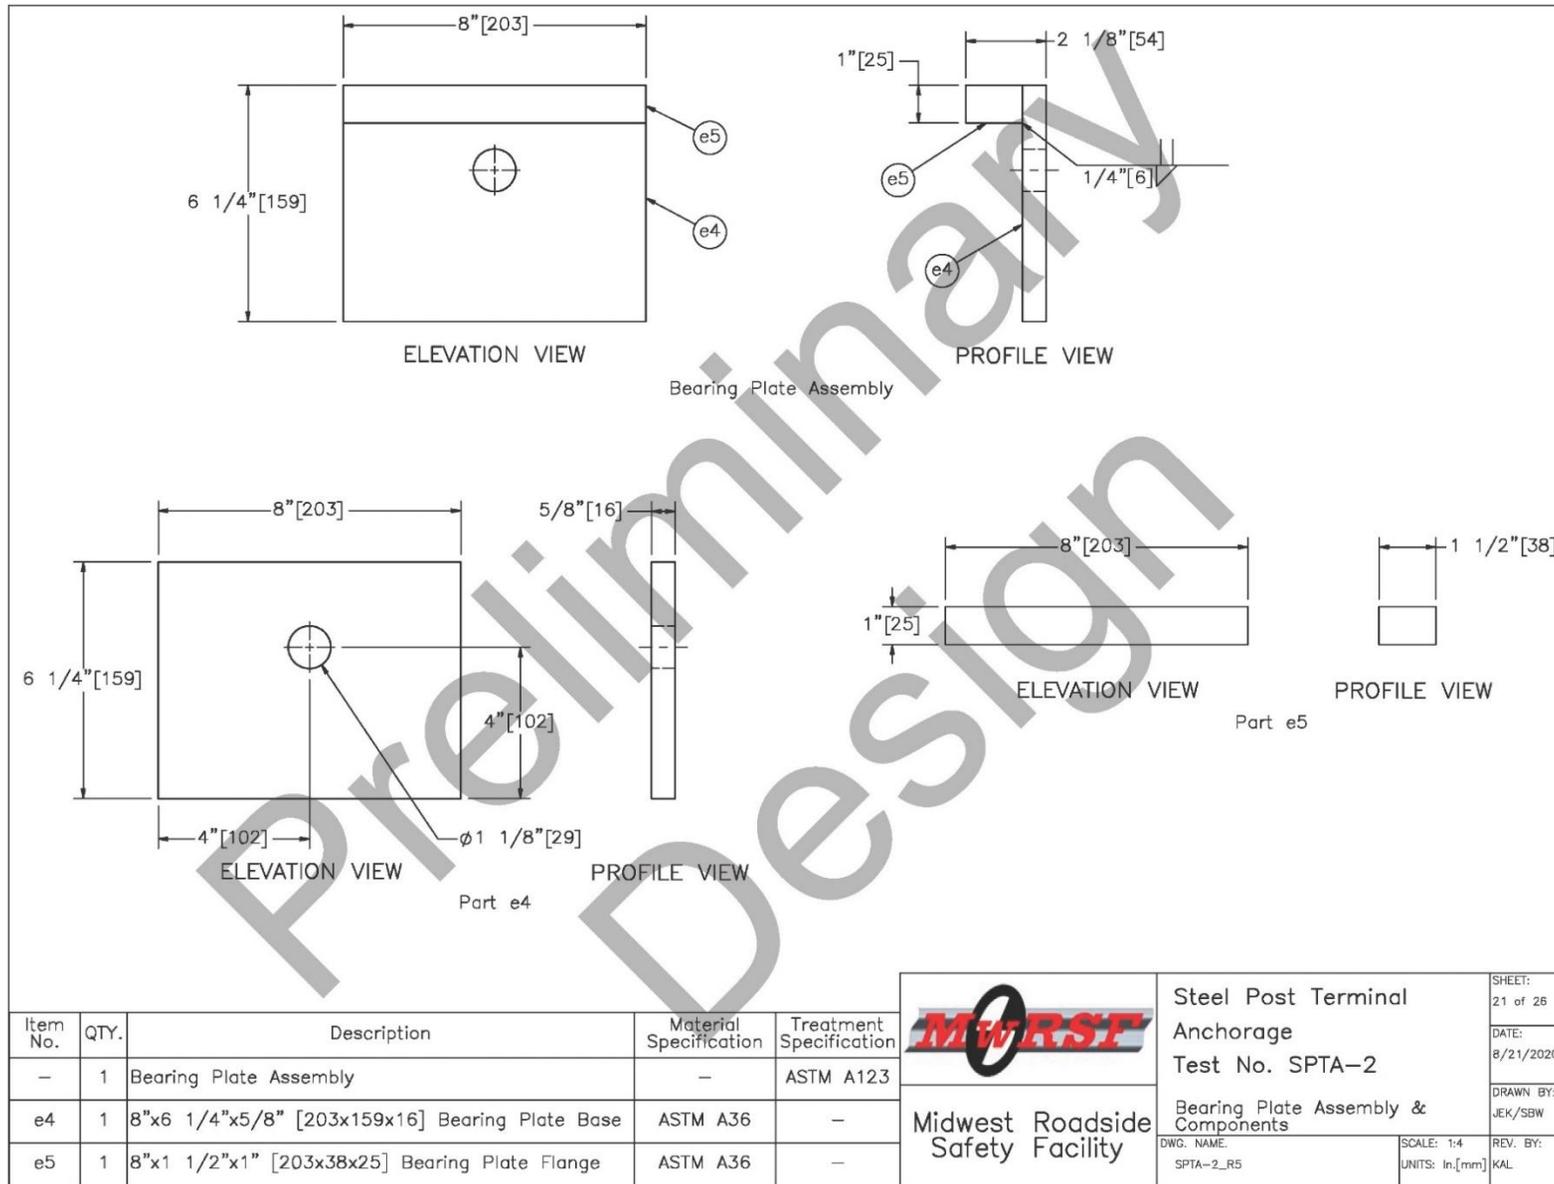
Bearing Plate Assembly and Components, Test No. SPTA-2
